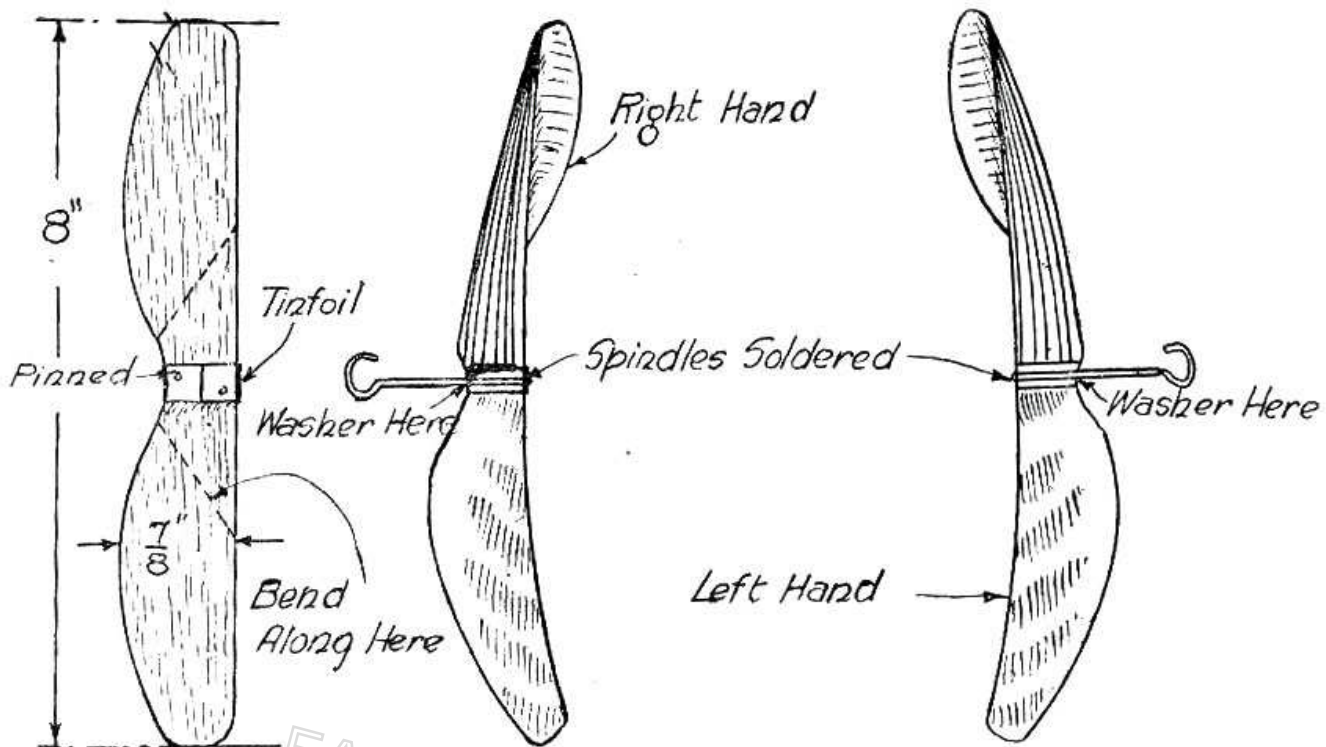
The propellers are cut from birchwood blanks to the shape shown, and then steamed and bent.
